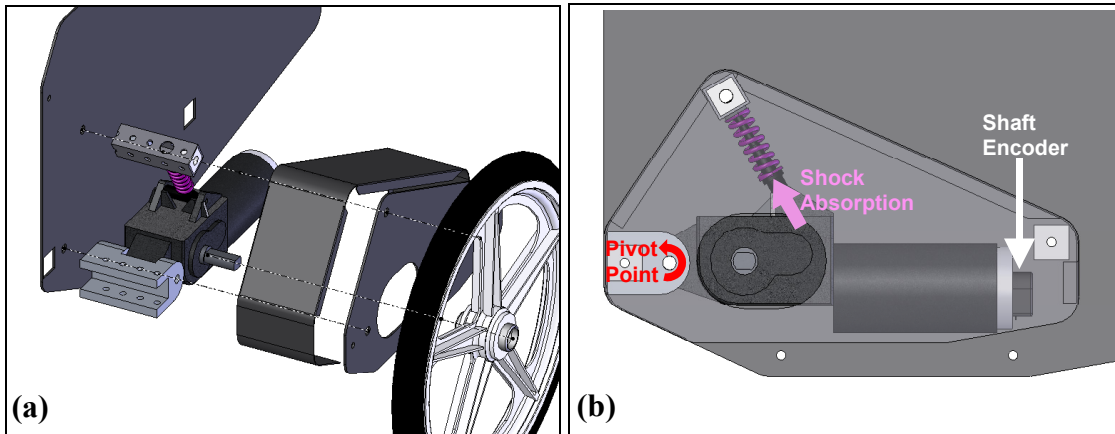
Left Motor Compartment (a) Exploded view (b) Side view
